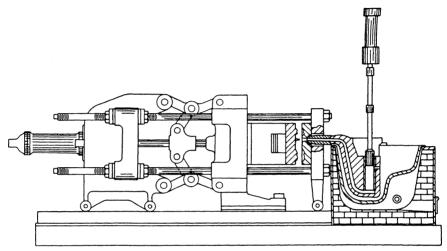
Principal components of a submerged-plunger machine for die casting of tin, lead, and zinc alloys.
